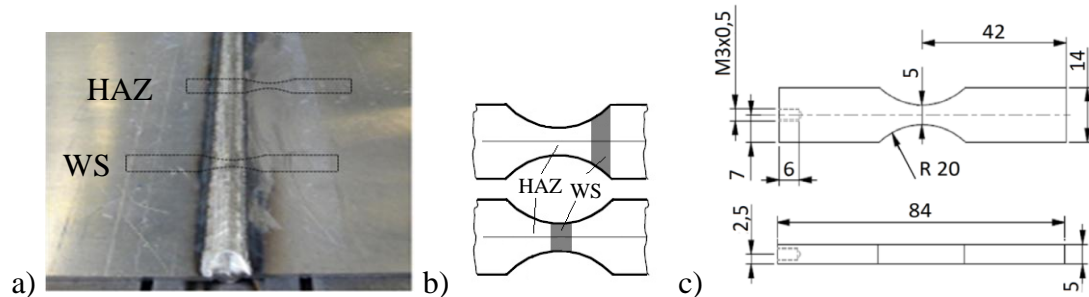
a) Welded blank with cut out positions (WS and HAZ) marked with dashed lines, b) resulting cross-sections of the fatigue samples and c) trimmed sample geometry.
